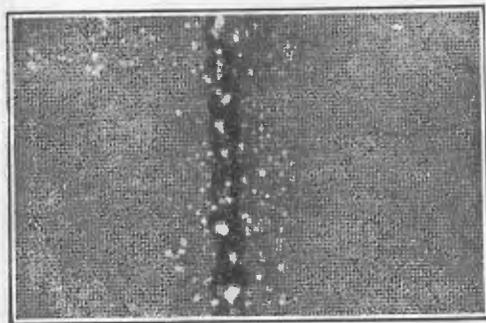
Radiograph of weld in metal steel plate.
